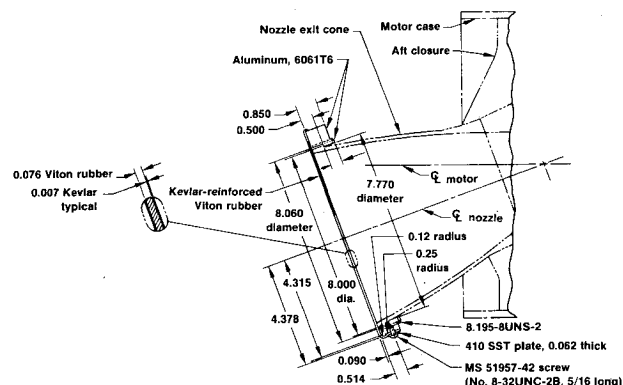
Frangible cover assembled to BSM exit cone (all dimensions are in inches).
